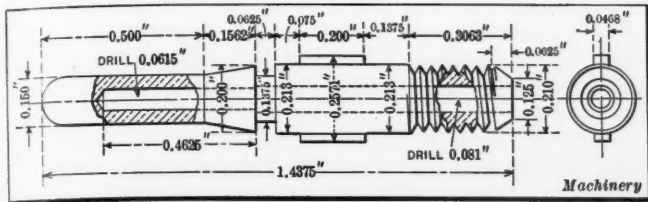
Type of Brass Pneumatic Tire Valve Stem drilled on Machine shown in Fig. 54
